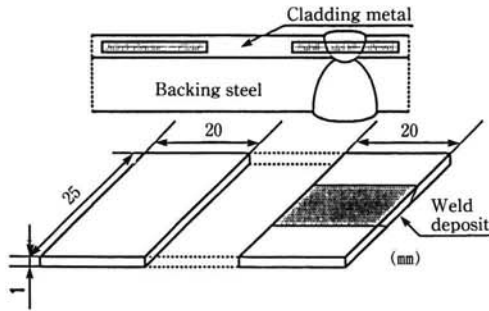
Corrosion test specimens from welds and sampled region
